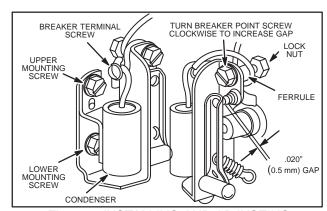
INSTALLING AND ADJUSTING BREAKER POINTS
